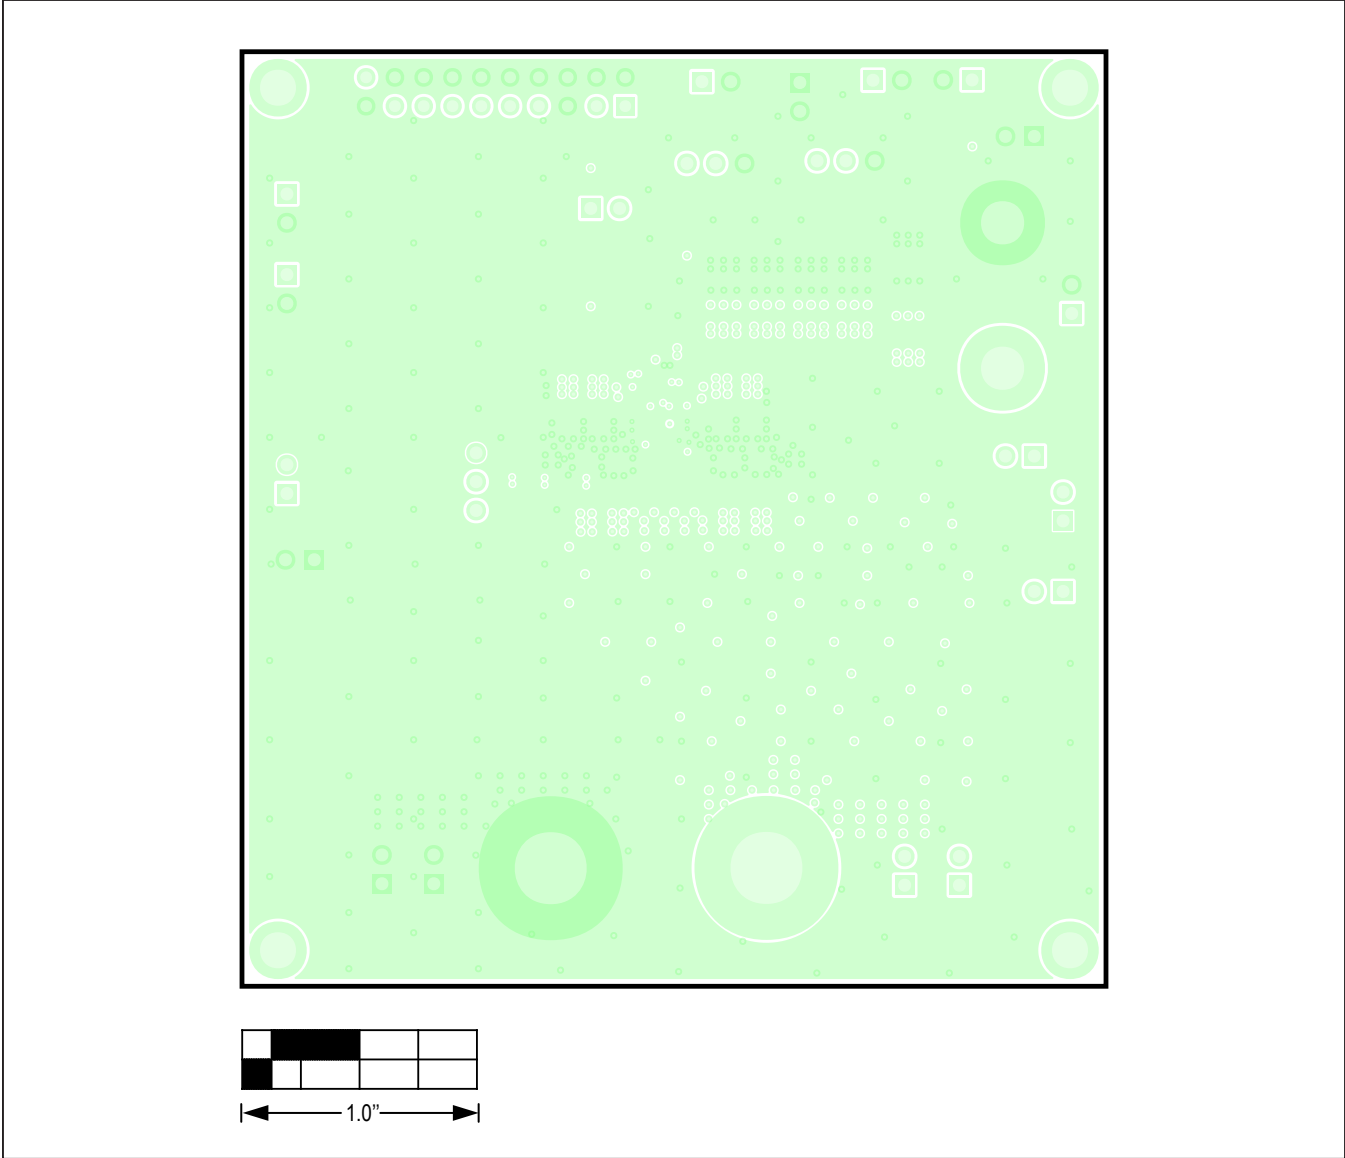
MAX20499A EV Kit Component Placement Guide—Inner Layer 7
